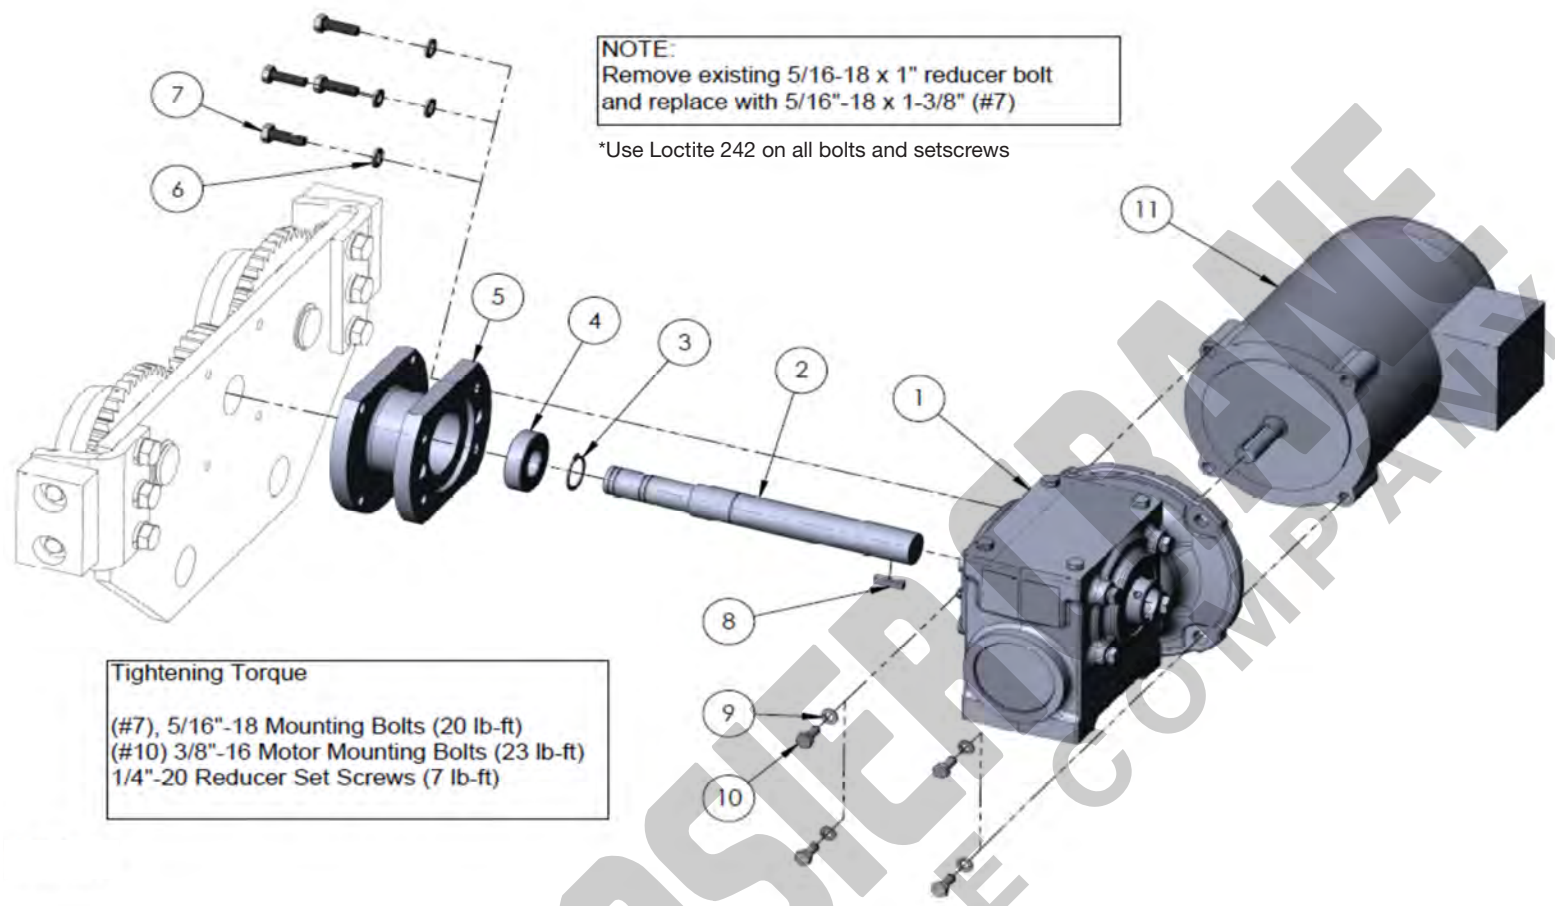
Motor and Gearbox Assembly (6", 9" & 16" c/c Pins)
